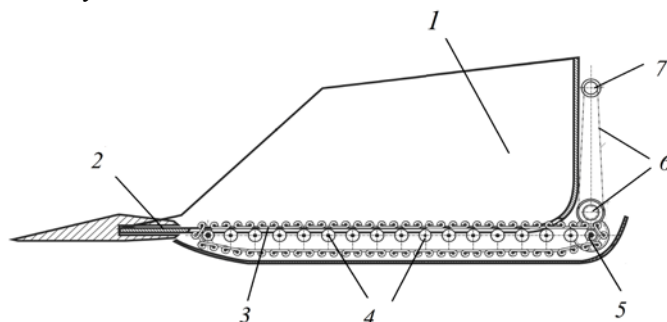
Bucket working body with conveyor bottom in the form of closed belt connected to the engine through mechanical transmission: 1 — side wall; 2 — bottom; 3 — closed belt; 4 — rollers; 5 — transport (drive) roller; 6 — mechanical transmission; 7 — engine
